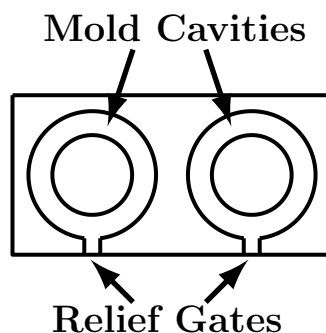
Two units of the washer mold. The physical mold consists of three pieces (two solid covers and the middle mold cavities), the middle piece simplifies the separation of each specimen from the mold.
